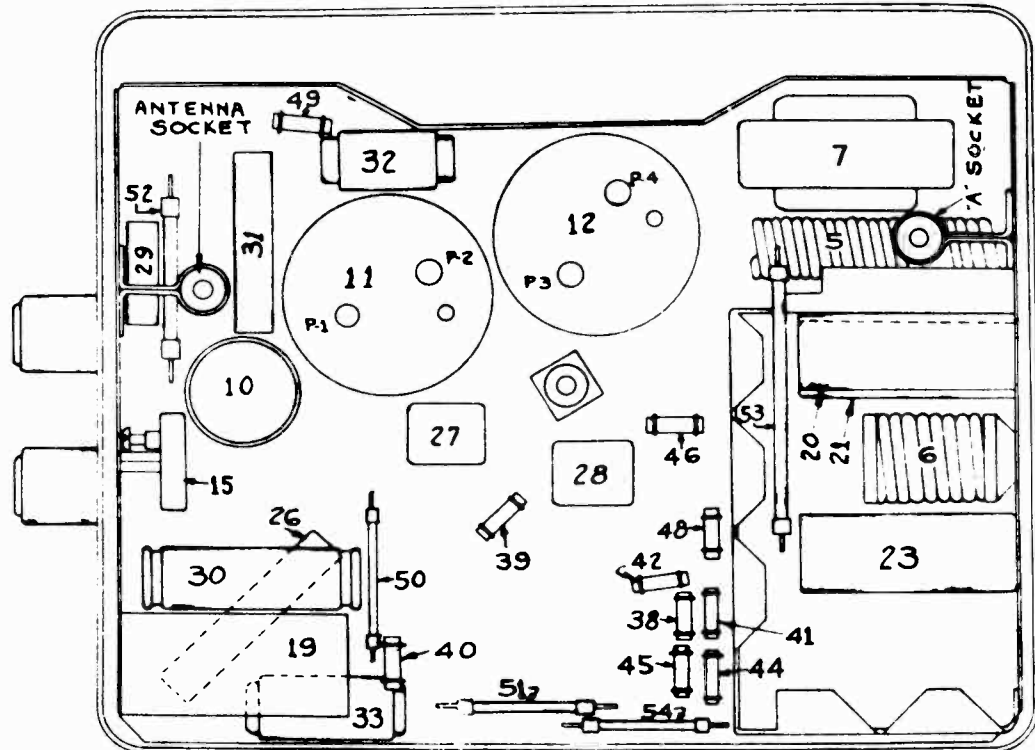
PARTS LAYOUT--BOTTOM VIEW
